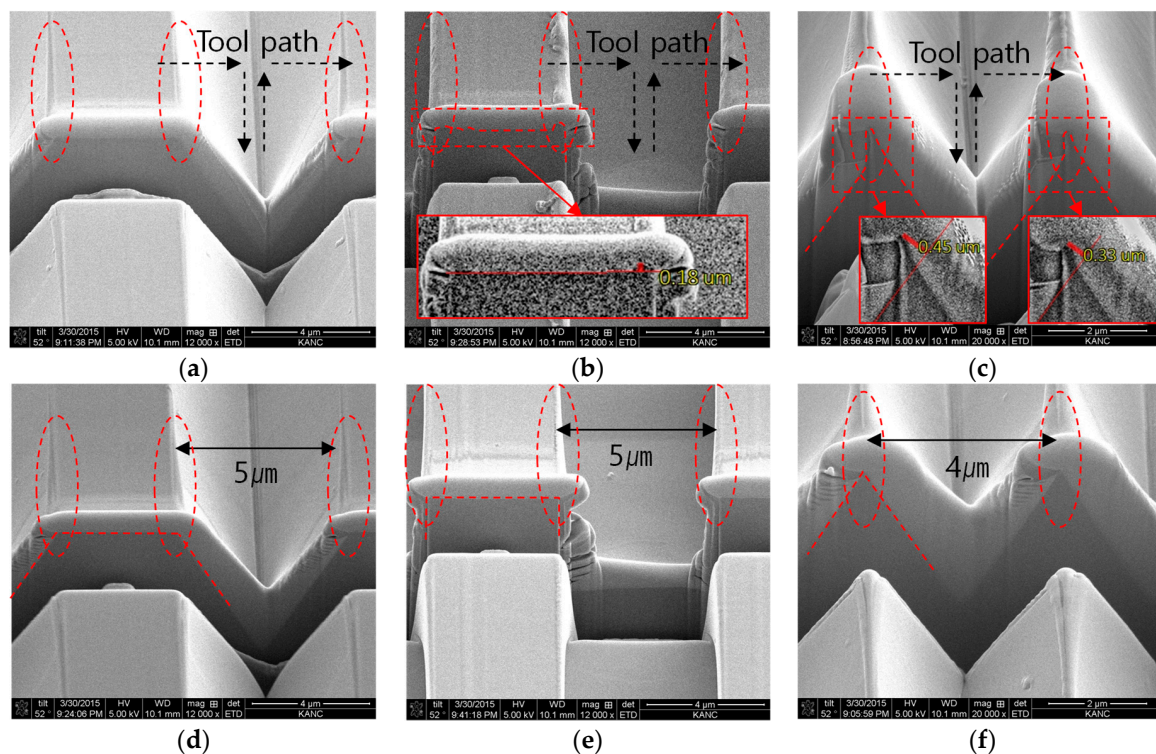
Machining with different tool paths: (a) changed tool path 1 (continuous contact area 'P1'), (b) changed tool path 2 (continuous contact area 'P2').
